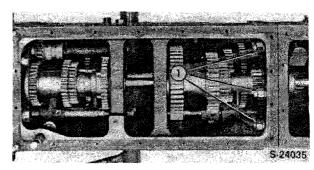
Internal Buckle-Up Bolts Removal (12x4 Transmission Shown)
